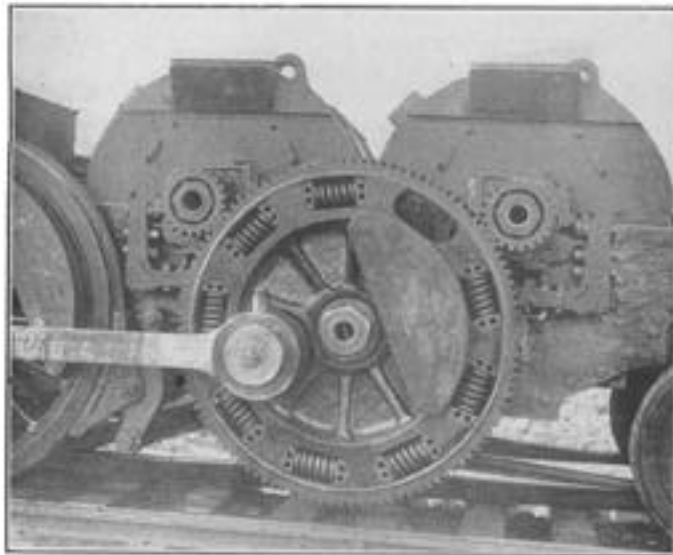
A View of the Jack Shaft With Its Spring Gear
